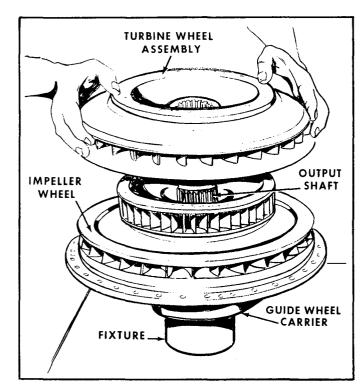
Removing the Turbine Wheel Assembly from the Output Shaft.
